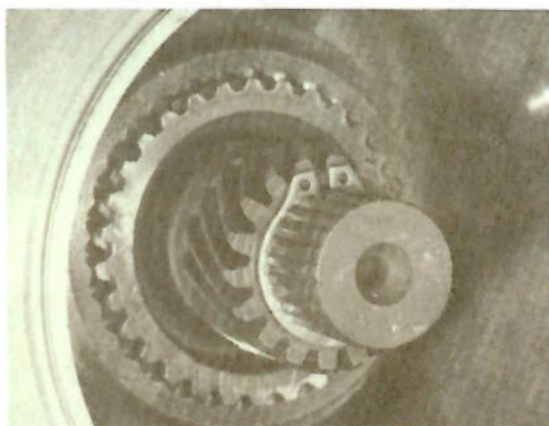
BRASS SYNCHRONIZER BLOCKING RING ENGAGED WITH THE SYNCHRONIZER ASSEMBLY.
